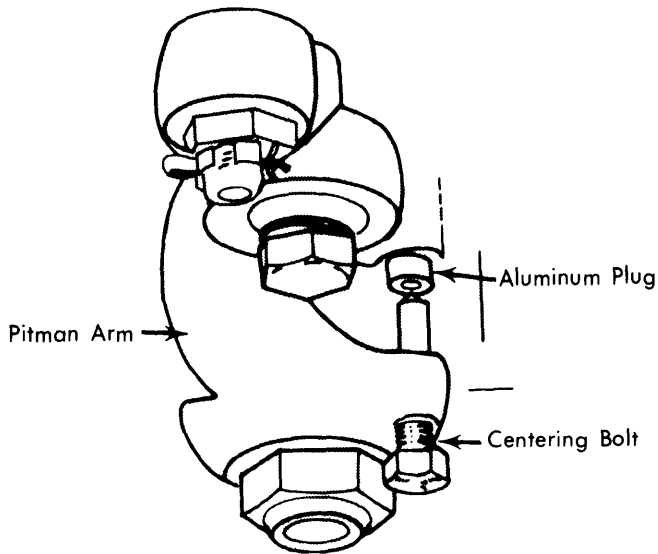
Using Special Centering Bolt to Properly Position Gear in Middle
